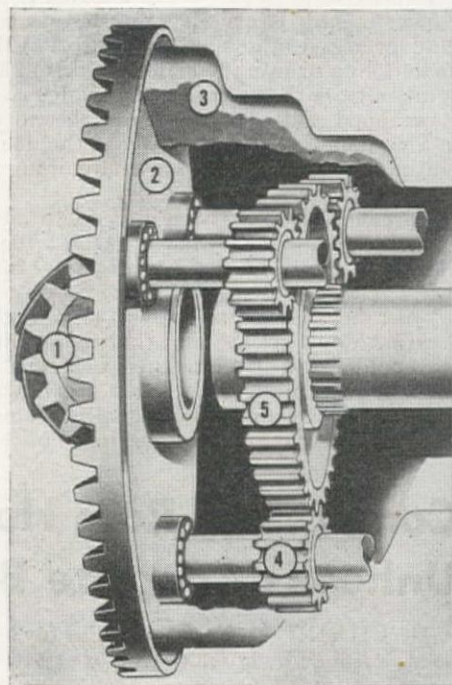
FIGURE A—Rear view of an elementary planet gear assembly (Explained in text).
